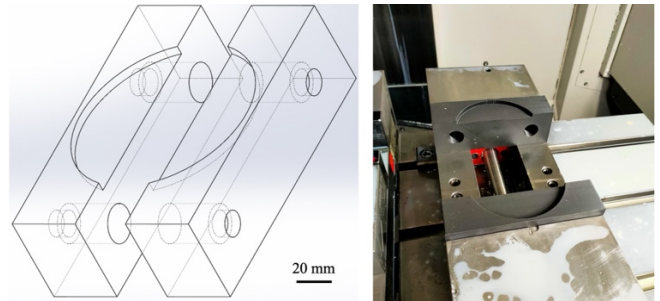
Fixture design and fabrication to support the parent structure during CNC machining
